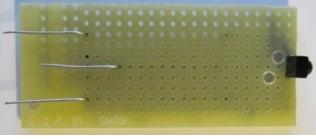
Back of PCB (with 1 kΩ pull-up resistor)
